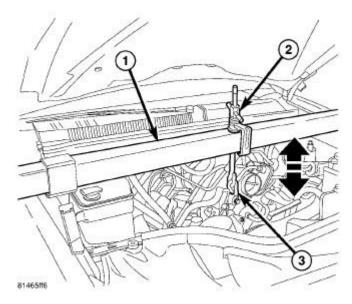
ENGINE SUPPORT TOOL Courtesy of CHRYSLER LLC
